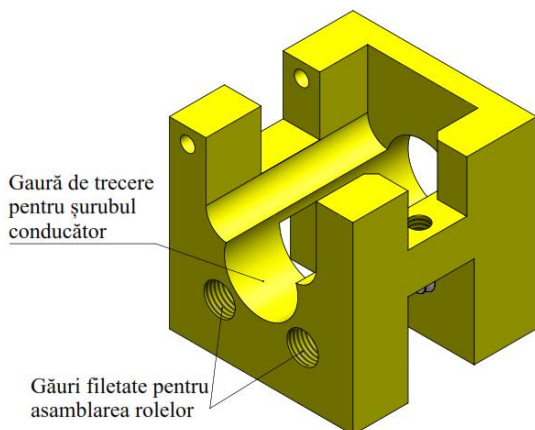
Highlighted holes used for fixing the rollers in the nut body
